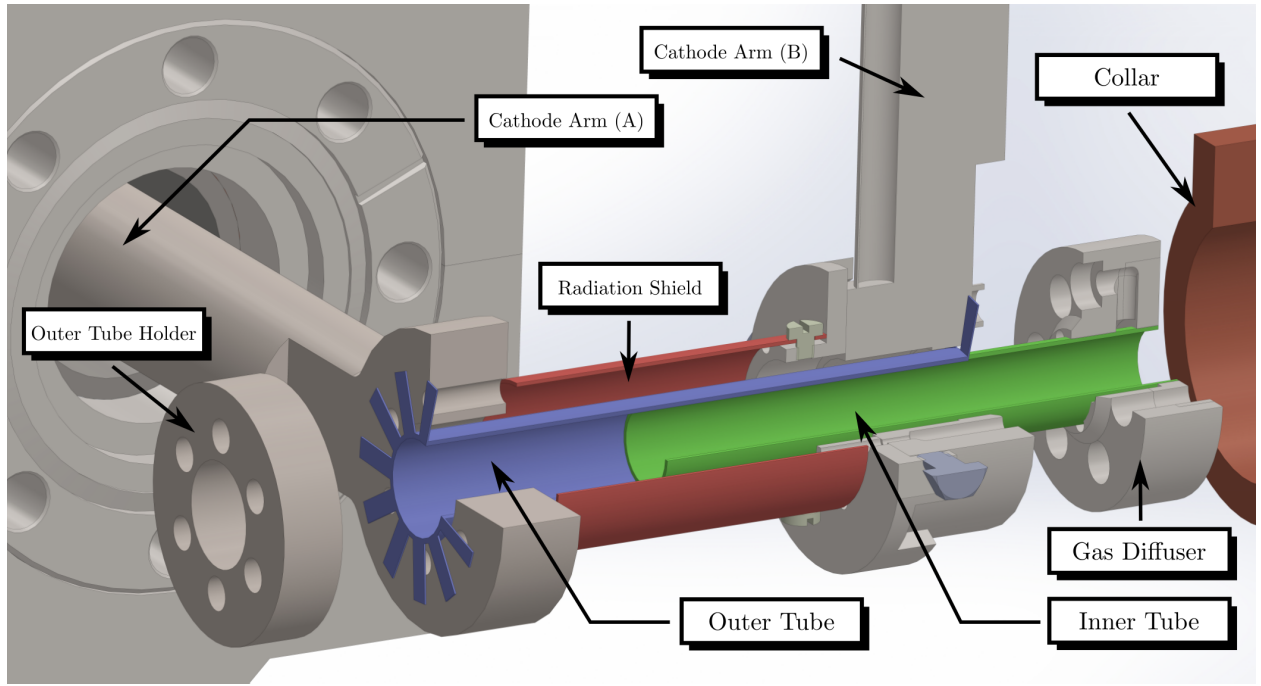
Partially exploded view of the hollow cathode assembly used in the UCLA plasma source.
